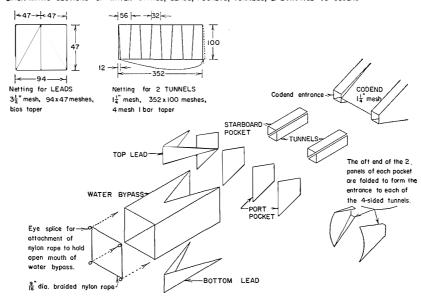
The details of construction of the body bypass section, and of the water-bypass, leads, pockets, tunnels and codend sntrance of the water-bypass "tunnel" midwater trawl.
